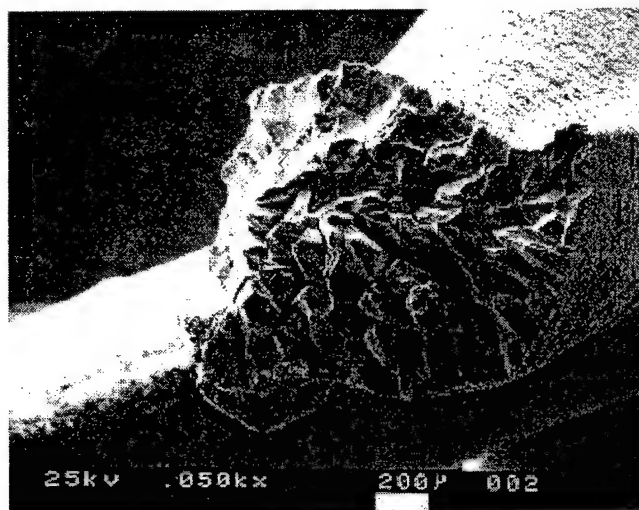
Fracture surface of tensile specimen fabricated from A356 LBM.
